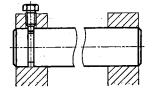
Pivot pin fixed against axial and angular displacements by set screw with cone point
